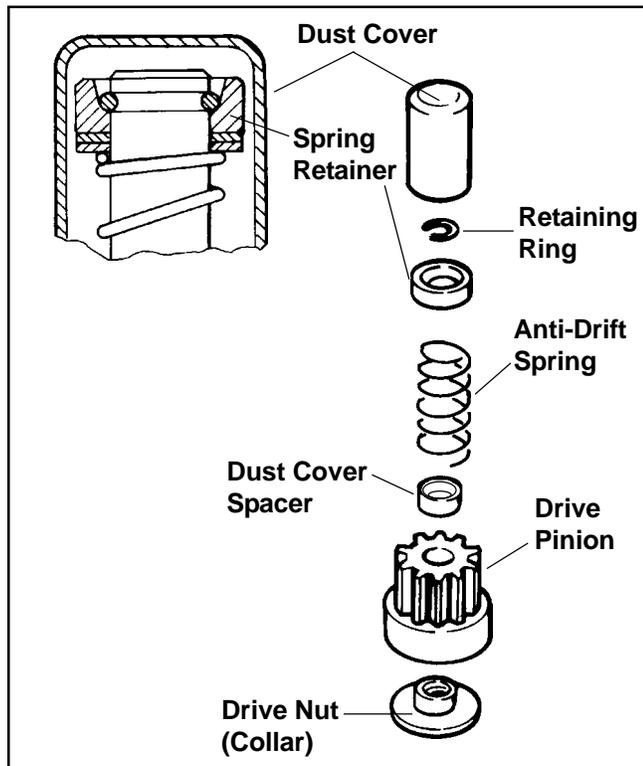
Drive Components, "Bonded" Inertia Drive Starter.
